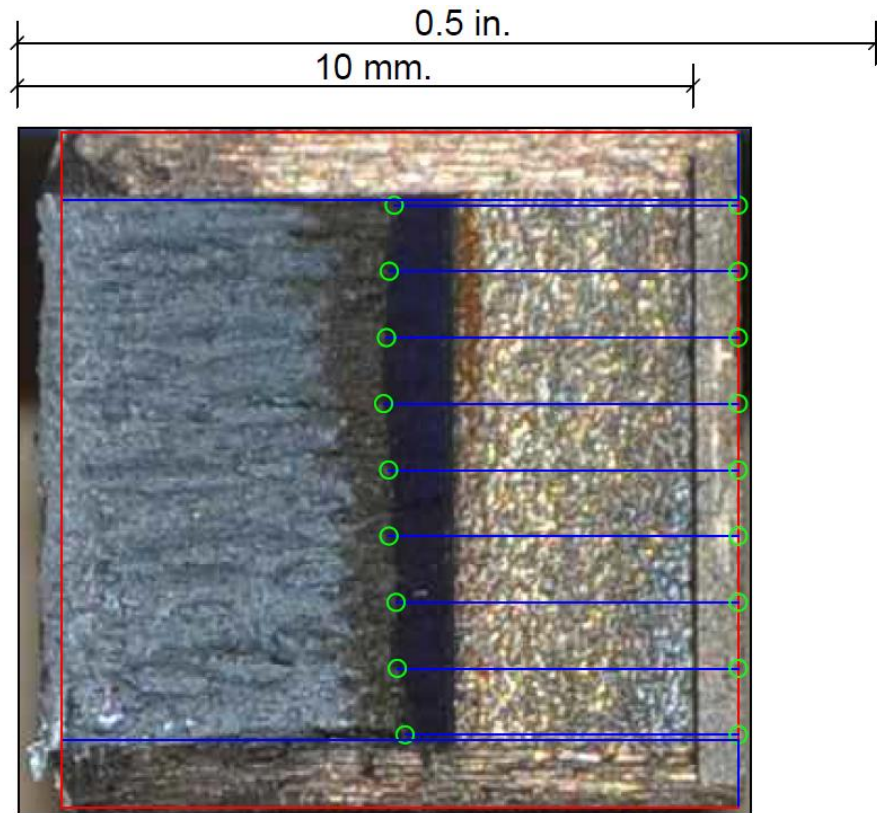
Specimen B2' Fracture Surface
